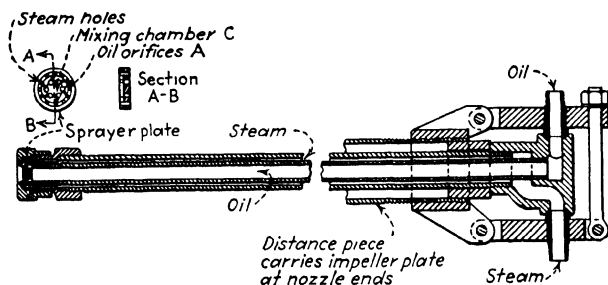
Inside-mix steam-atomizing conical flame oil-burner barrel assembly used in standard Babcock and Wilcox register.
